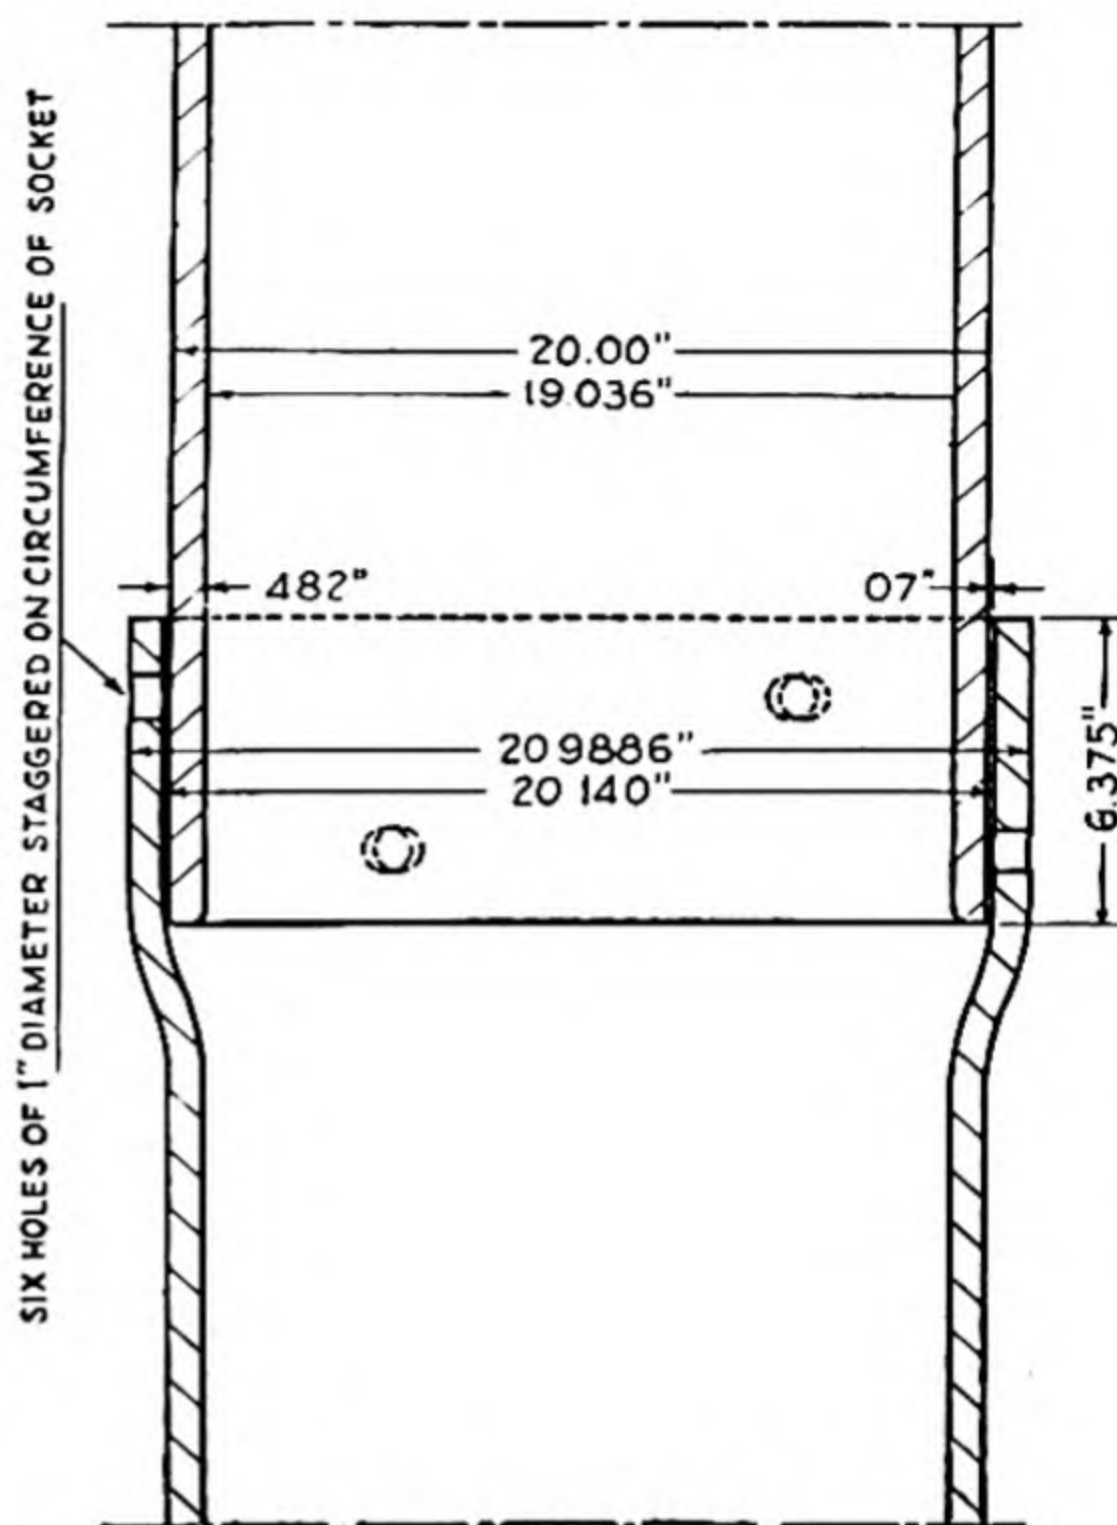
Astco slip-joint conductor casing. Dimensions given are for 20-in. outside diameter, 104-lb. casing.
